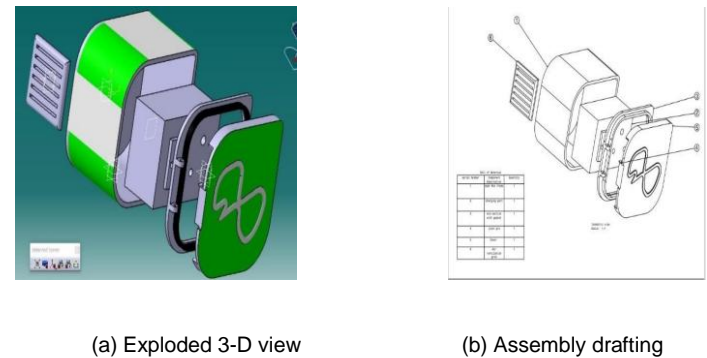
Exploded view and drafting of enclosure parts with bill of materials.
